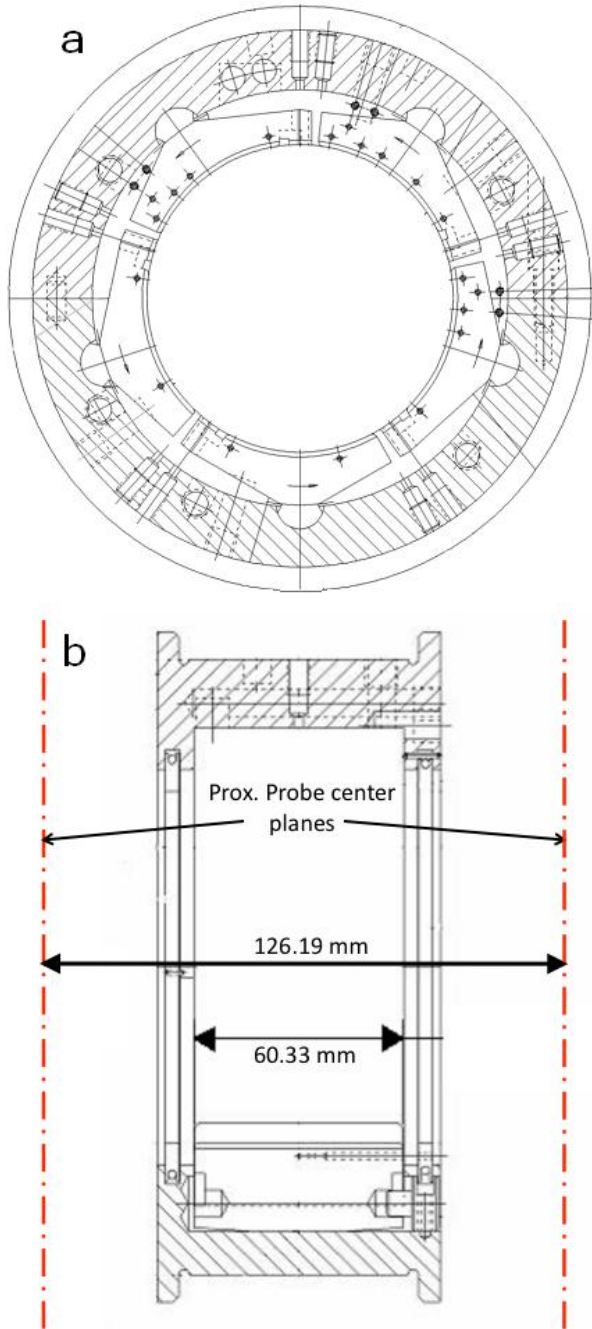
5-pad, rocker-pad bearing in LOP configuration; (a) End view, (b) Side view showing measurement planes
